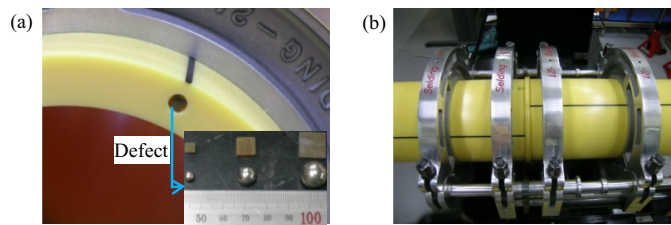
(a) Inserting a defect (ball or plate) into a previous shallow drilling defect location; (b) Butt fusion welding and cooling.
